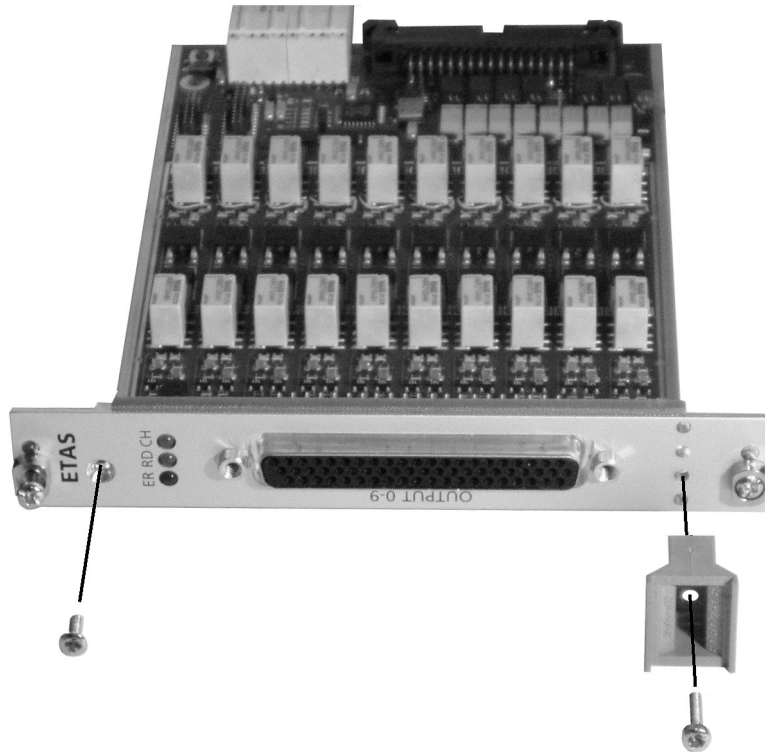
Attaching the Upper and Lower Fastening Screws
